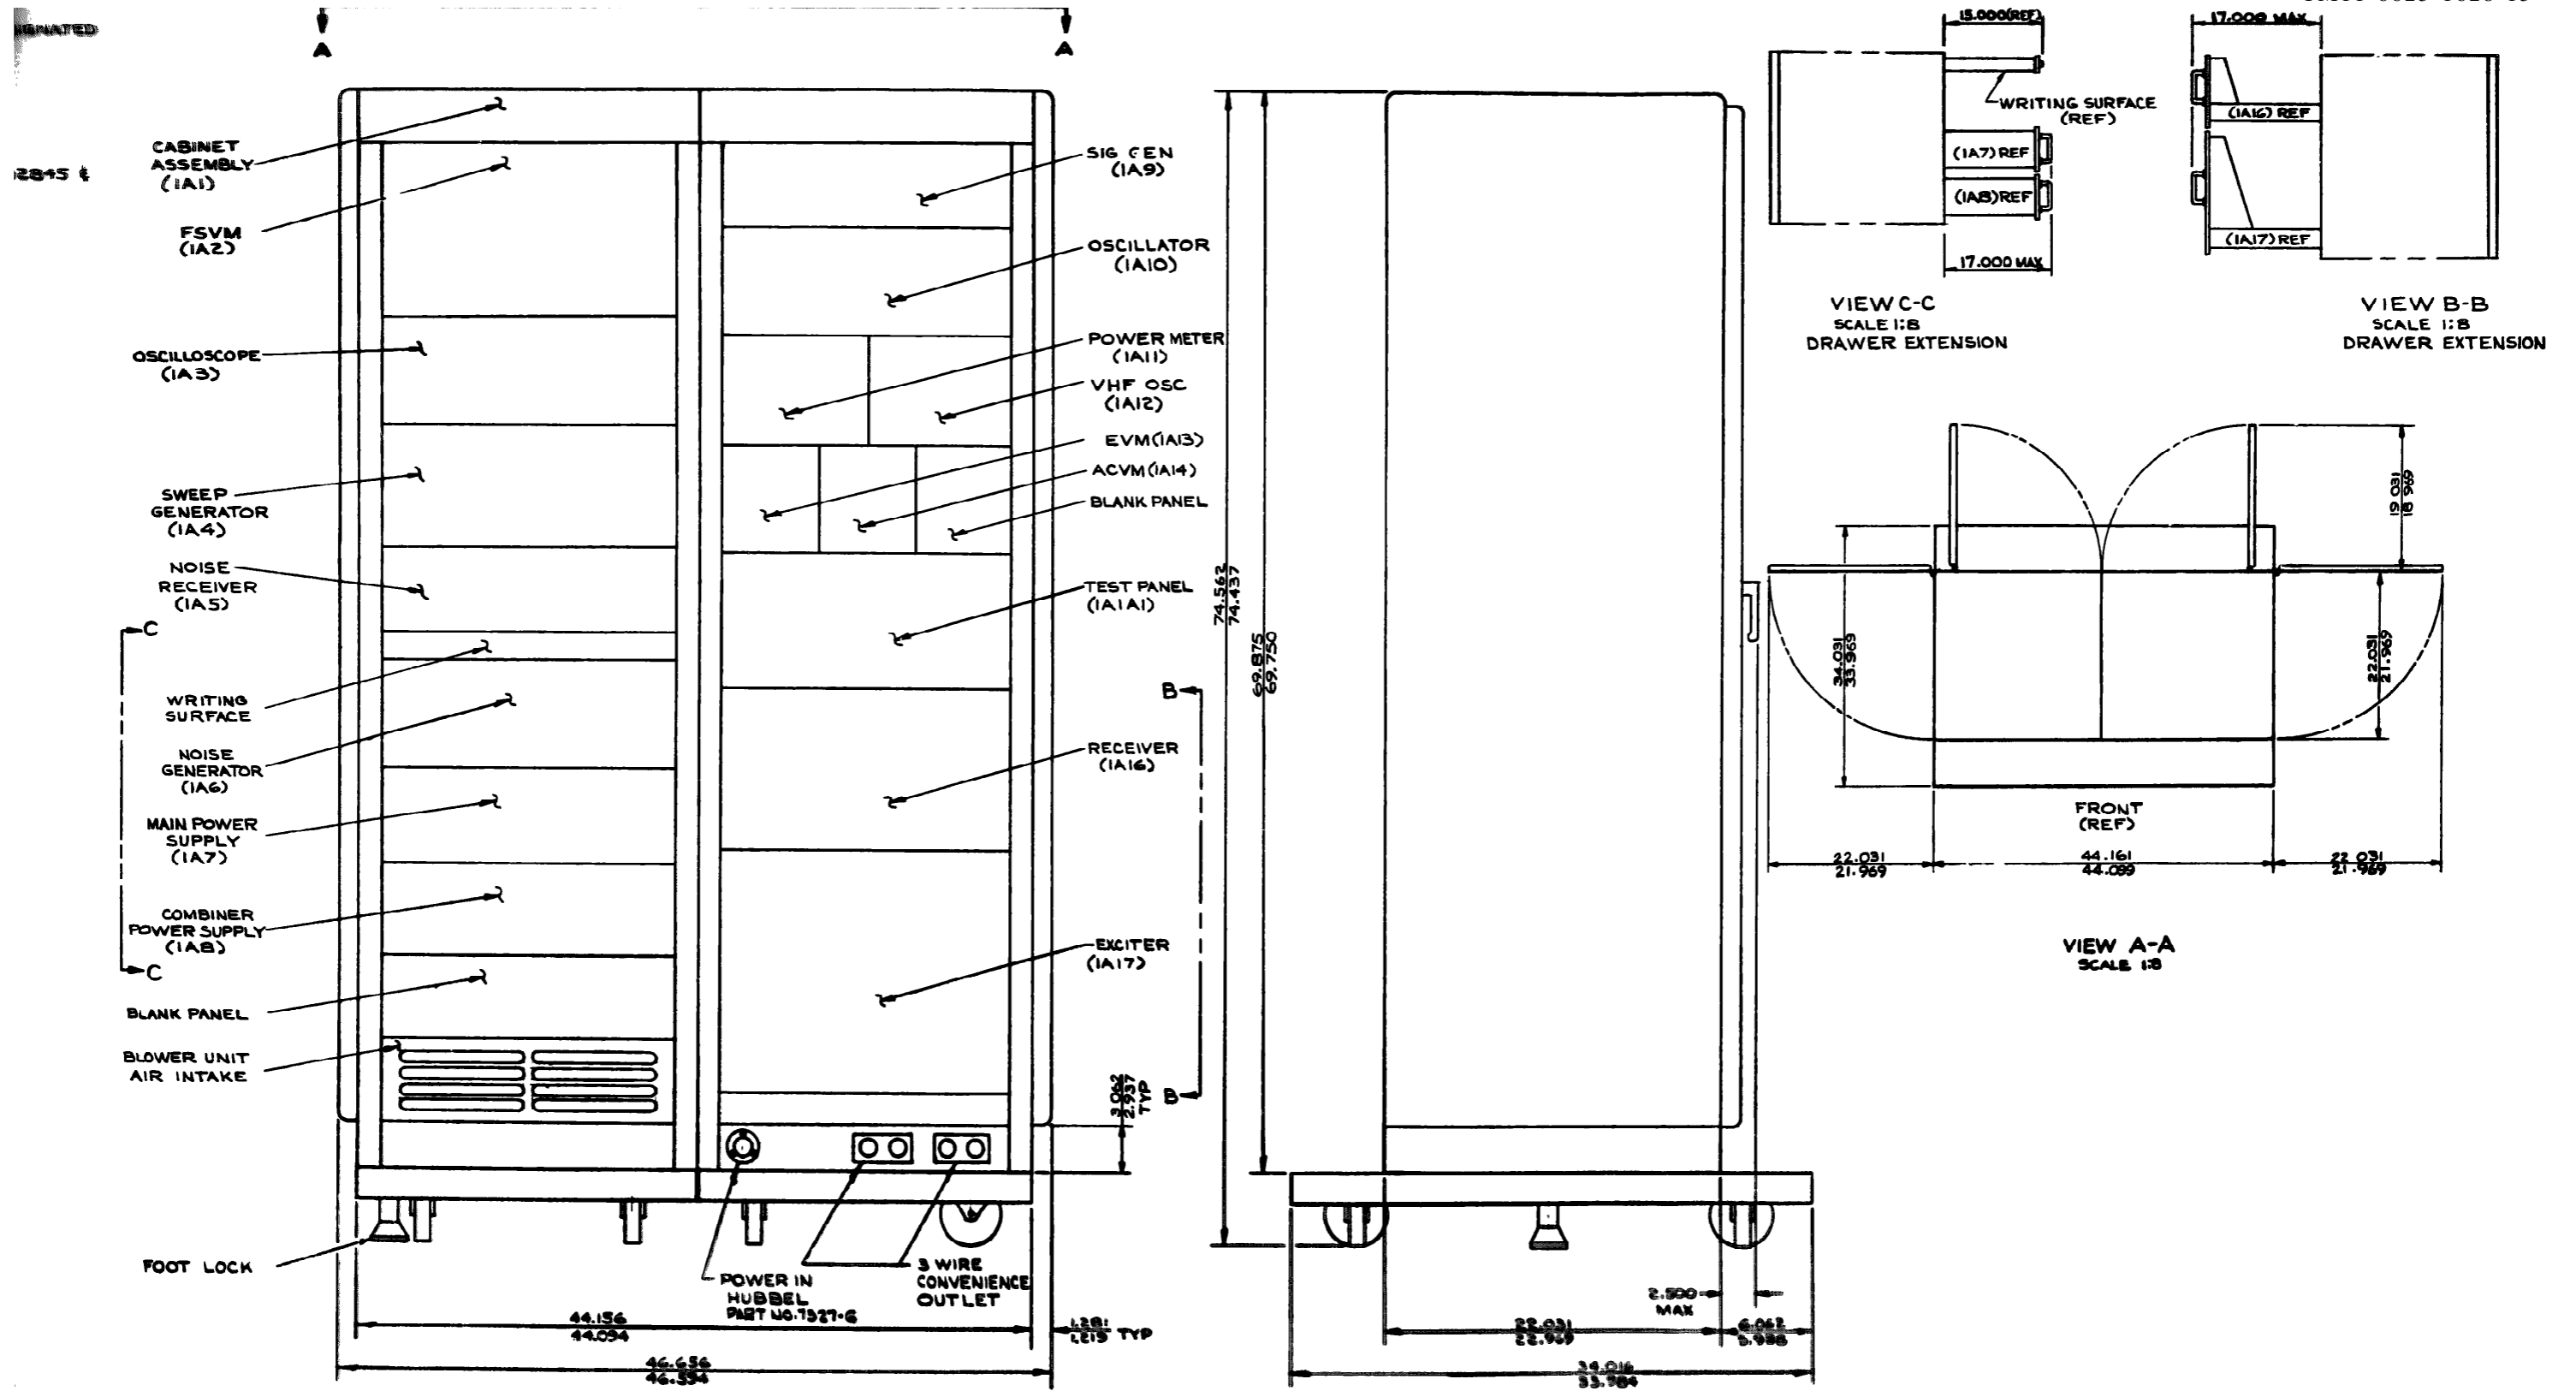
Maintenance Test Facility Floor Space Requirements
